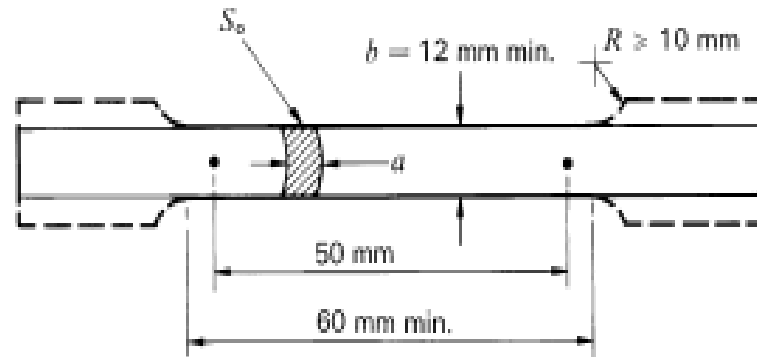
Test specimen dimensions for pipes and tubes - II
